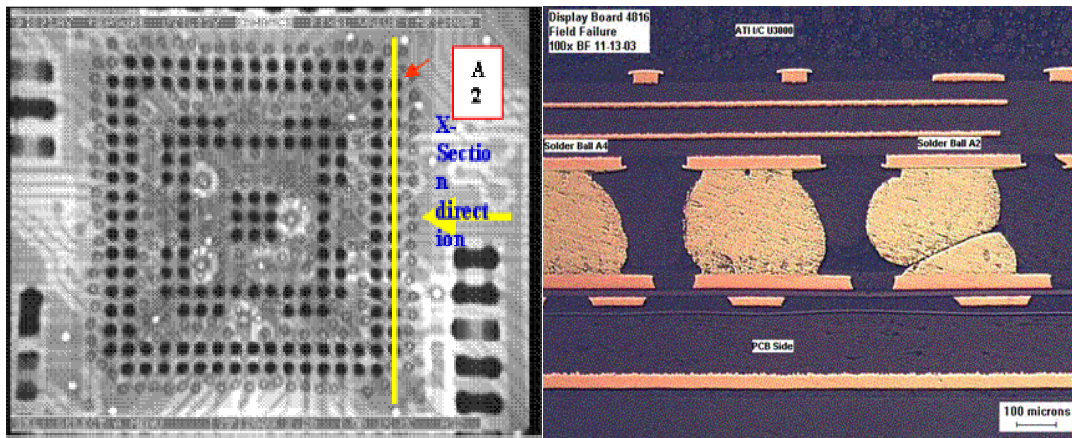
U3000 (ATI) – Open Solder Connection at Pin A2
